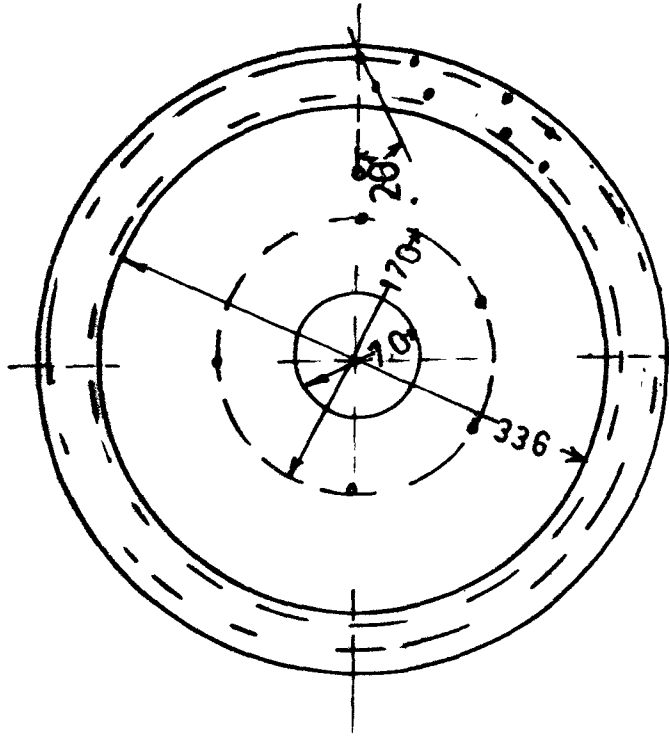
SCHEMATIC VIEW OF IMPELLER OF BLOWER 'A'
